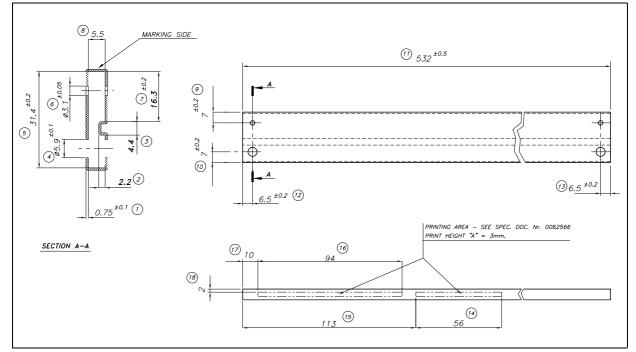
Drawing dimension TO-220 (type STD-ST Single Gauge)
